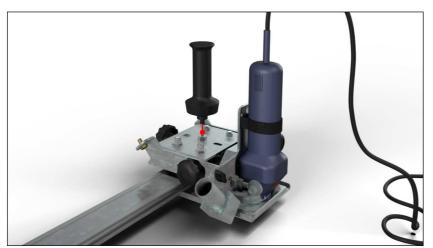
Knob to lock the screw for the millimetric adjustment.
